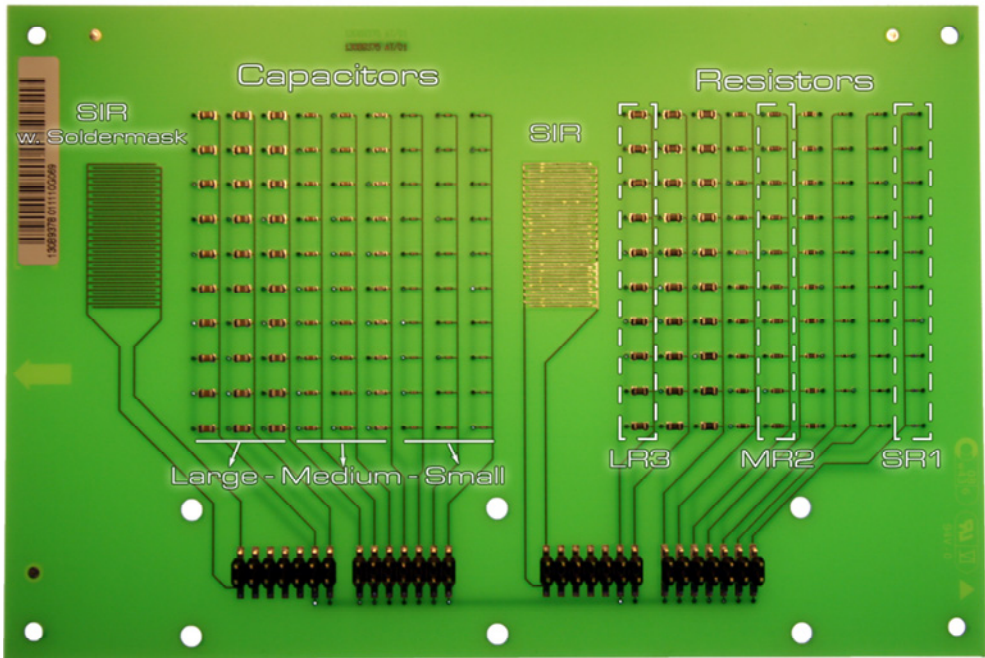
An example of Mounted CELCORR test PCB. All the component circuits are connected to pin connector for electrical contact to the PCBA.
